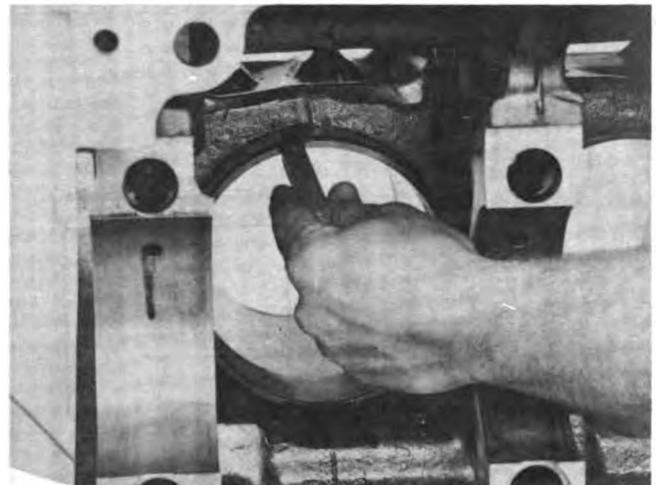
Check The Clearance Between The Cylinder Liner And Lower Bore.
